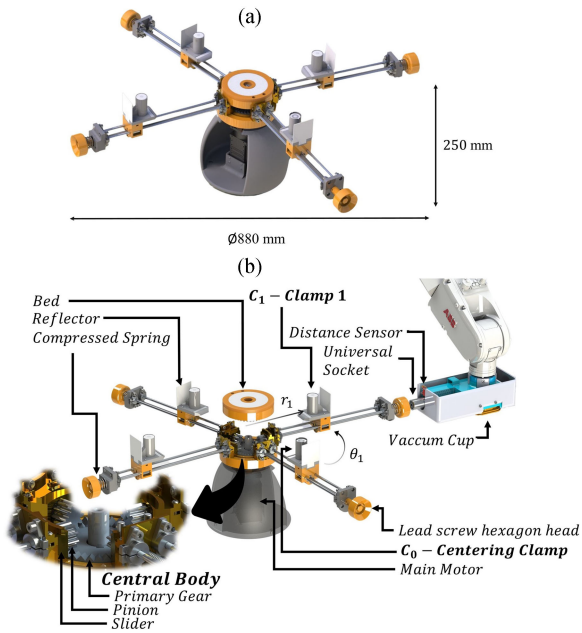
A CAD rendering of (a) the SIMJig alone, and (b) a partially exploded view with an adjacent external driver. Each clamp of the SIMJig is driven by a lead screw which can be powered by either the pinion or the hexagonal head. Typically, the clamp pinions are meshed with the primary gear. This results in simultaneous retraction or extension of the clamps together. The gripper-driver (top right) is used to drive and calibrate the SIMJig, and to place (or remove) workpieces onto the SIMJig bed.
